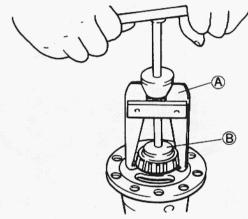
(A) Special tool (Bearing puller 09913-60910)
